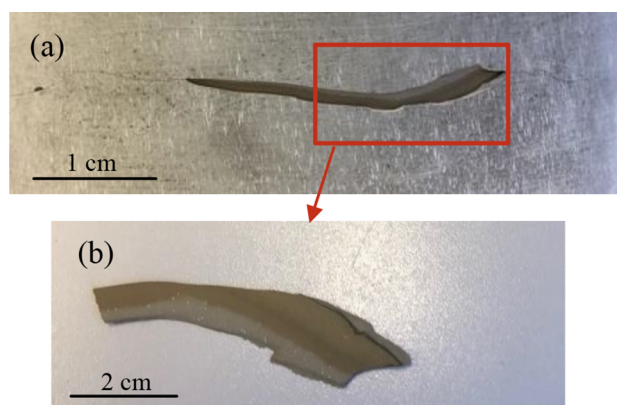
Cracking of crucible type B upon the heat treatment : (a) cracking and peeling of the outer surface; (b) the peel geometry (0.72 mm thickness).
